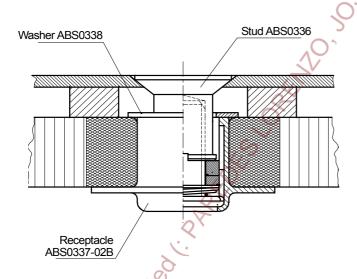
Example of final assembly - 2 - start ABS0336 / ABS0337 quick release system
